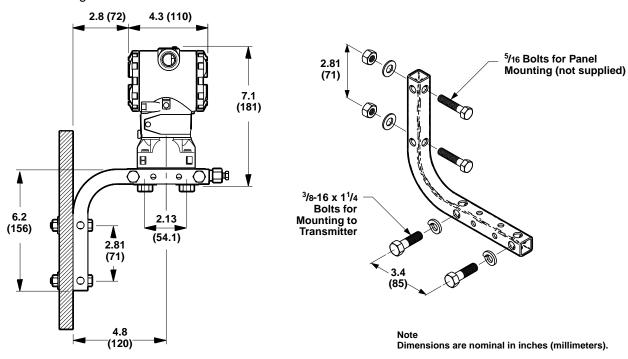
Rosemount 3051N Coplanar Flange Dimensional Drawing (Differential Pressure Transmitter Shown)
